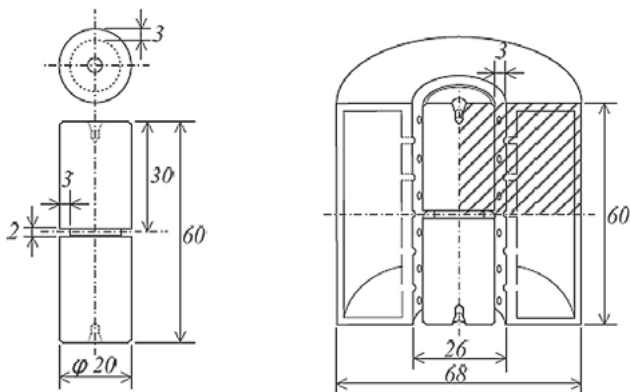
Shape and dimension of cylindrical specimen and heat inductor⁴⁹⁾.
